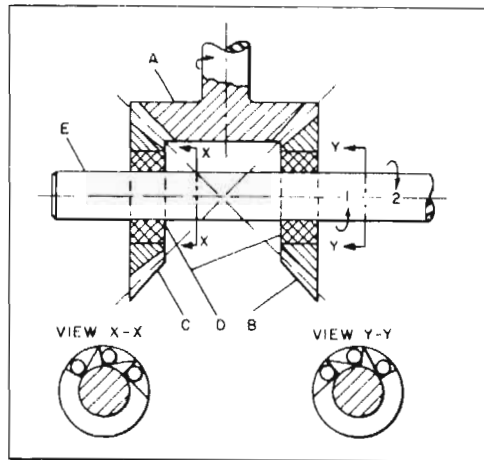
Two bevel gears mounted on roller clutches *D* provide unidirectional rotation for driven gear *A* regardless of rotational direction of drive-shaft *E*.
